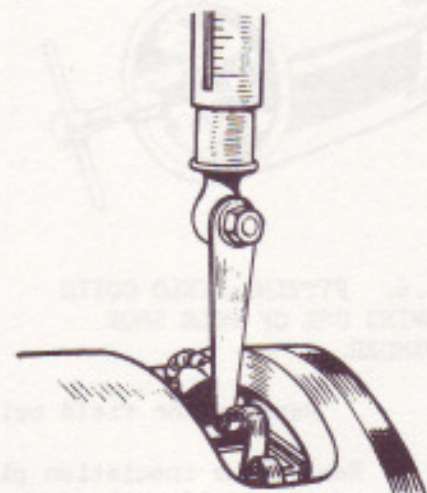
SHOWING CHECKING OF BRUSH SPRING TENSION.
